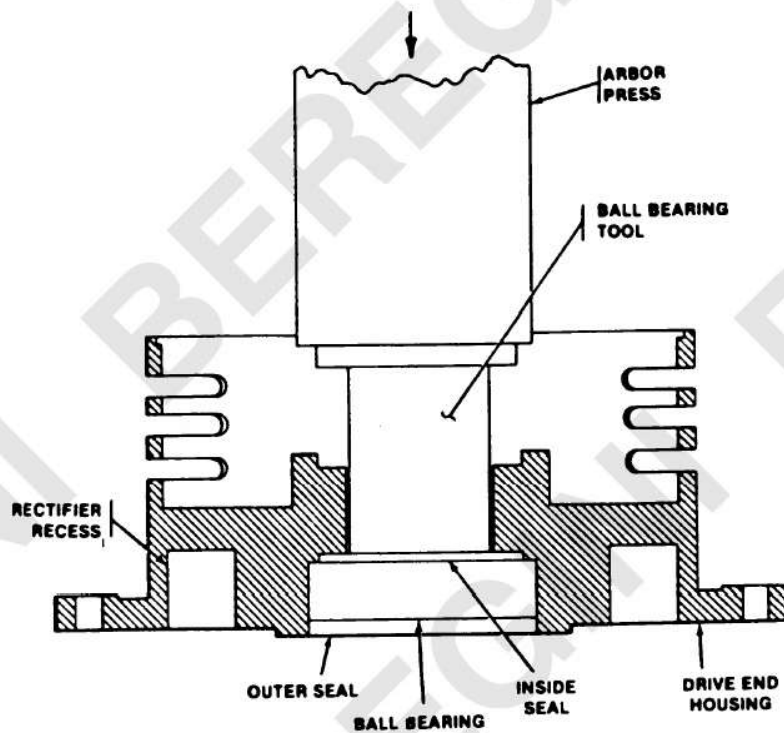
Inside Seal, Ball Bearing, and Outer Seal Removal from Drive-End Housing Assembly.
